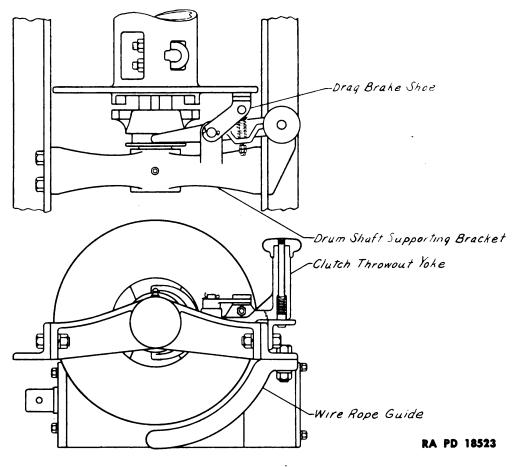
View of Winch Showing Drum Clutch and Drag Brake
